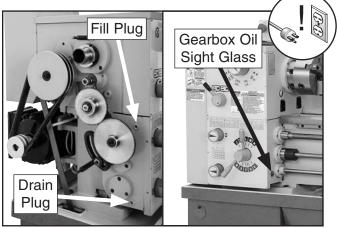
Location of gearbox fill and drain plugs and oil sight glass.
